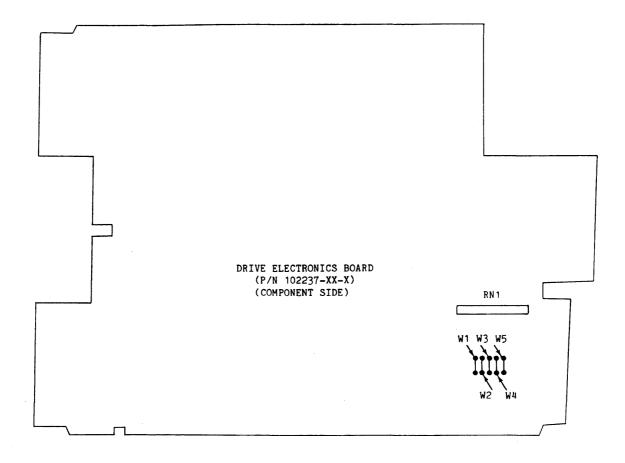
Drive Electronics Board Address Jumpers and Terminators
